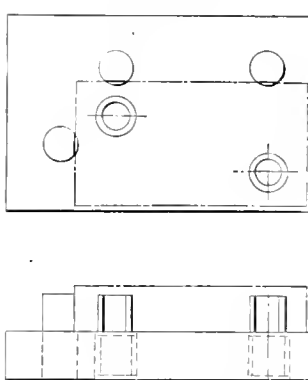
First Improvement of Plate Jig. Locating Pins Inserted.
